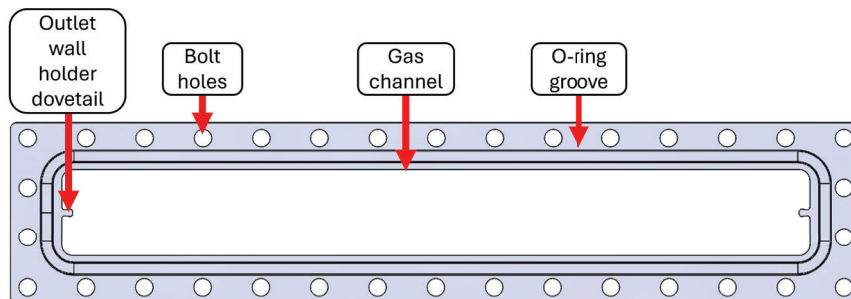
The intermediary plate between the diffuser assembly and the cooling chamber includes rounded dovetail features which hold the outlet wall locating pieces described in Section 3.4.2. This plate also includes a dovetail O-ring groove to hold the O-ring which seals this plate to the diffuser assembly.
